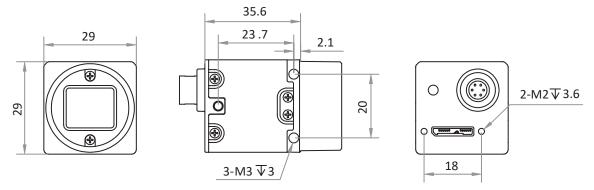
29 mm×29 mm×30 mm Mechanical Dimensions (in mm) of the USB3.0 camera with the USB interface at the bottom.
